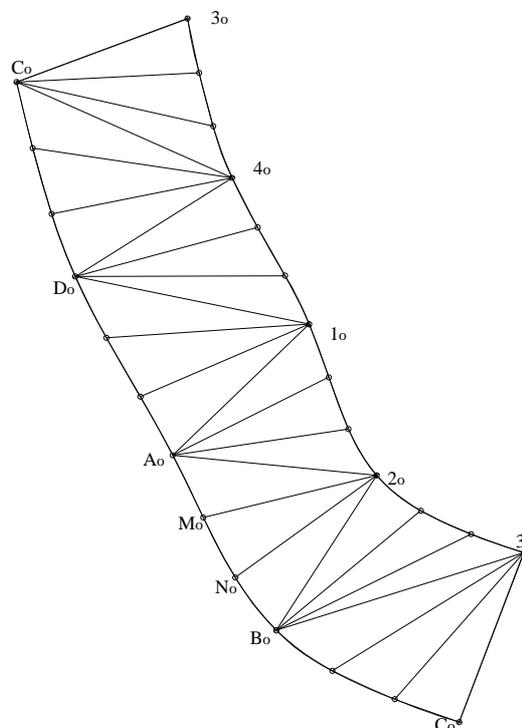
Unfolding of the connection which join two cylindrical sections, tangential in a point
